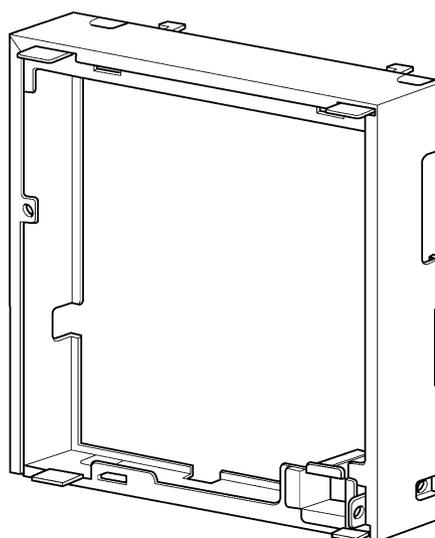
Front Cover Extender (FCE-U13 Unit)
